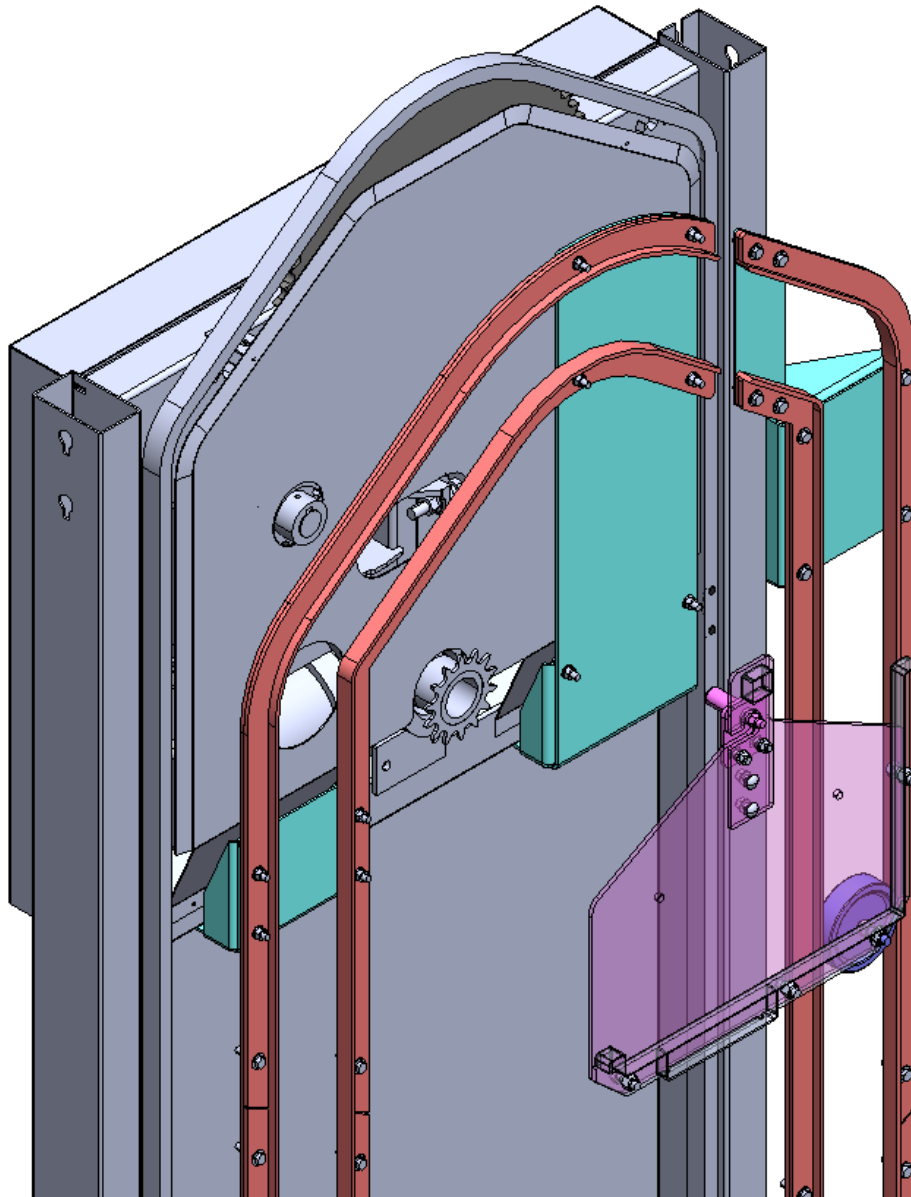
ISOMETRIC VIEW OF THE HIGHLIGHTED COMPONENTS OF THE DESIGN.
